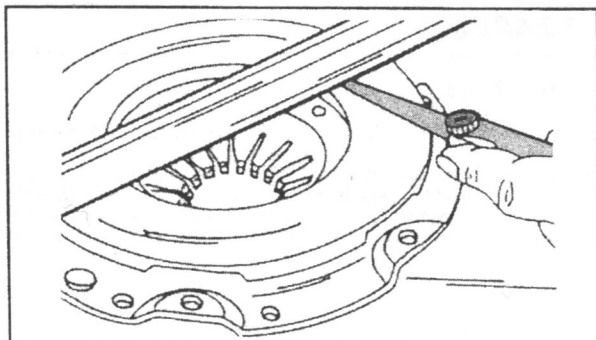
Checking the clutch pressure plate for distortion. The gap should be no more than 0.3 mm (0.012 in.) at the point shown. The max. run-out of the driven plate should be no more than 0.4 mm (0.016 in.).
